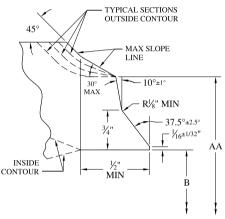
B.- Welding End for No backing Ring or for Split BackIngRing. Pipe Wall Thickness "t" Greater Than 7/8"
